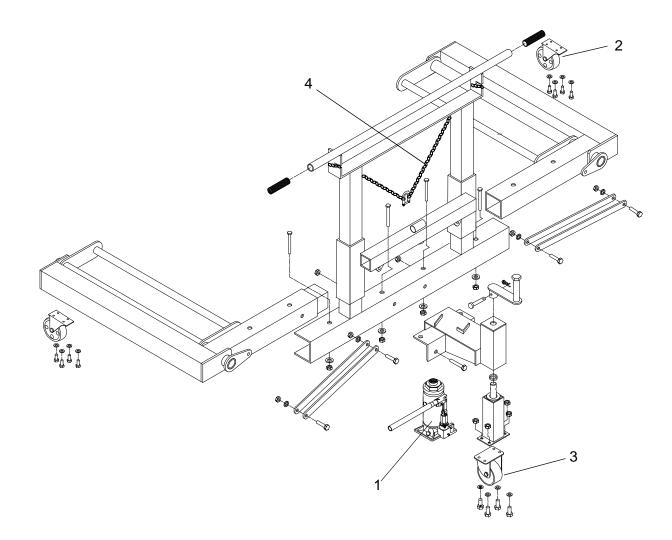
Replacement Parts and Assembly Illustration for Model WD1500
